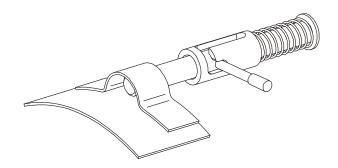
DEAD BOLT TYPE STEERING LOCK DISENGAGED
